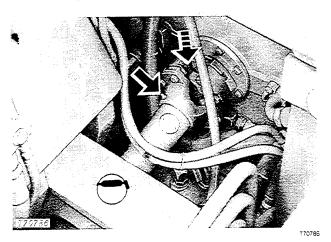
Transmission Drive Shaft Universal Joints and Tube (front joint) (2 points)
